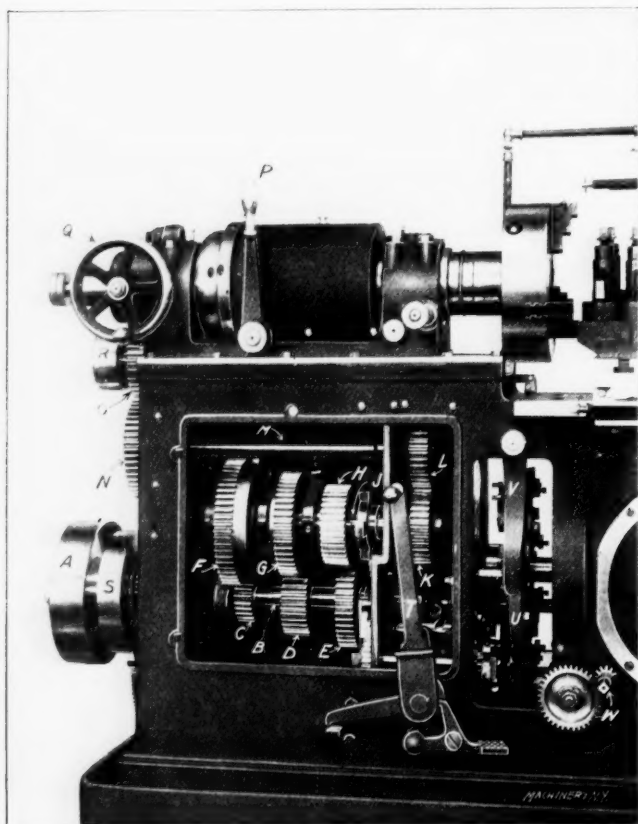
Door in Base removed to show Spindle Driving Mechanism.
